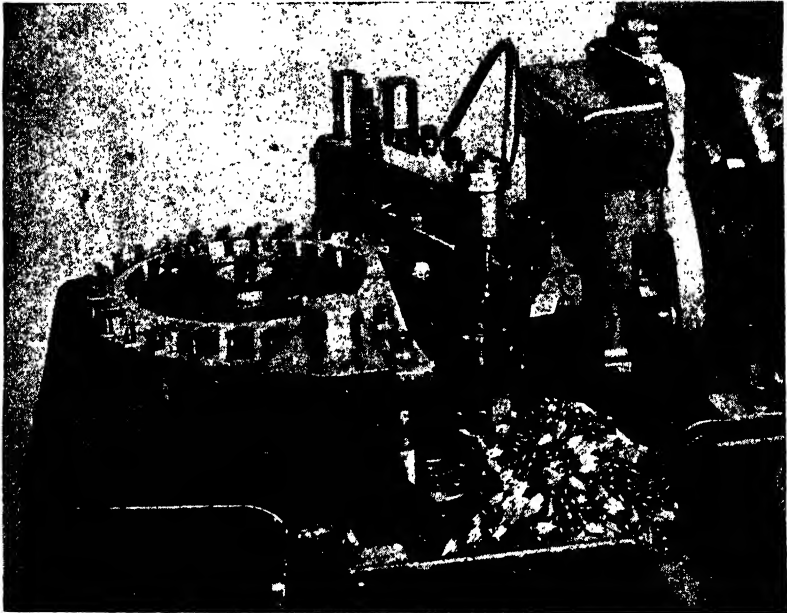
A.—Cutter, cutter head, and work of a Fellows gear shaper for small pinions. This shows the dial feed and the loading arm.
